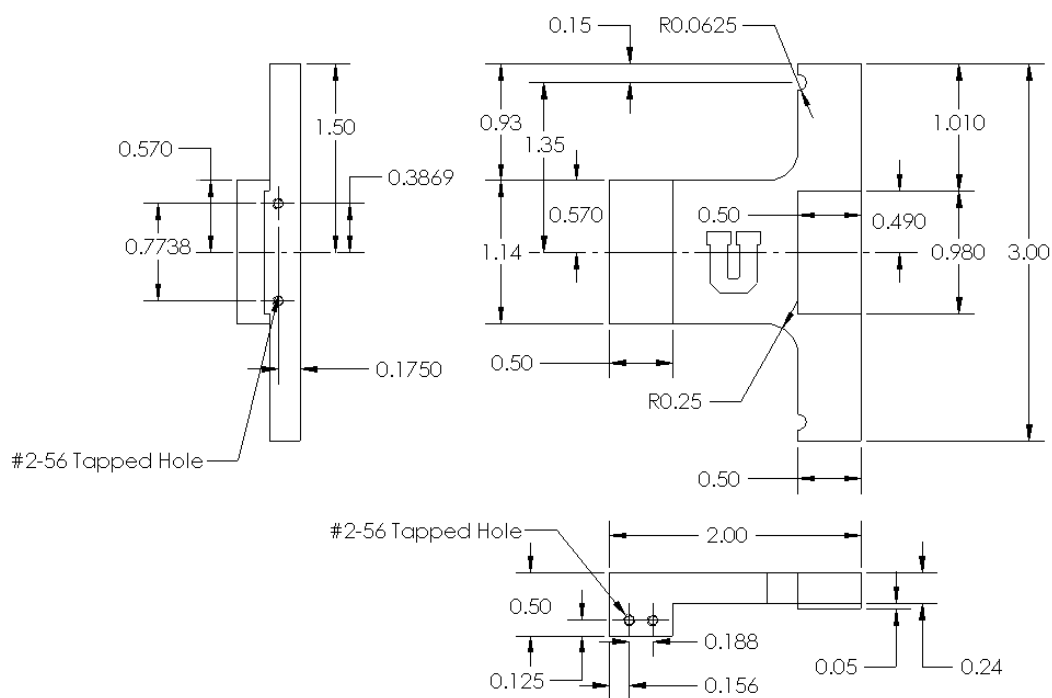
Dimensions of the chassis of the shear strain extensometer. All dimensions are in inches.
